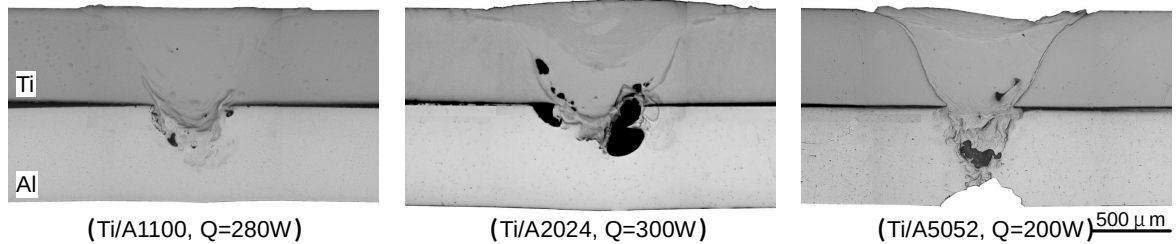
Macrostructures of welded joint. (PW=5.0ms)
